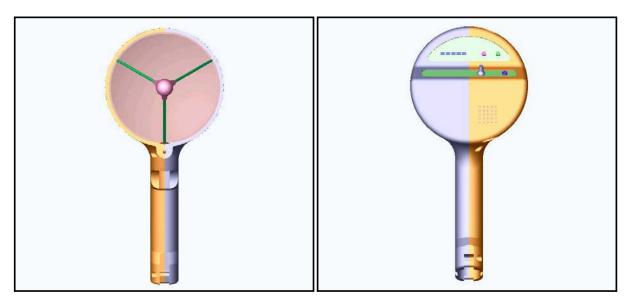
Front and rear views of prototype design showing tripod transducer mount (front view) and rear controls and display (rear view).
